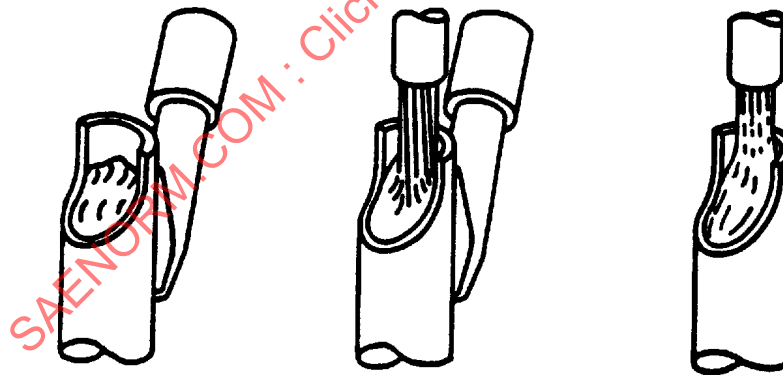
Soldering of hollow cylindrical connections (see 4.9.5.1)
